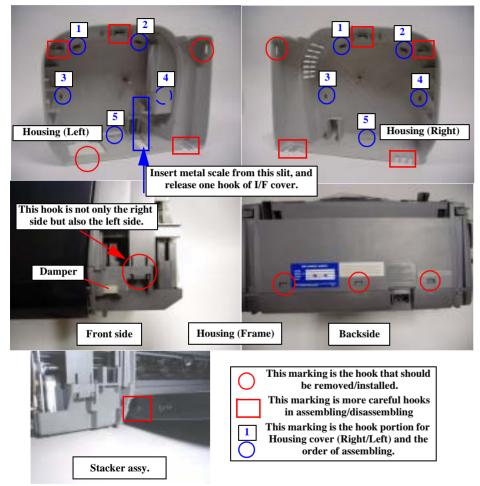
Housing (Right/Left/Frame) and Stacker assy. removal
